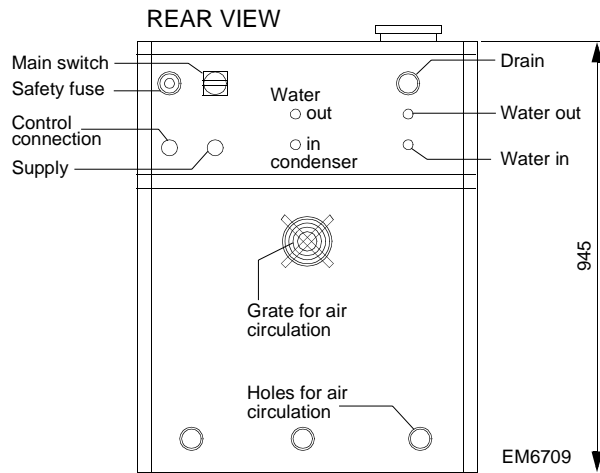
Dimensioned sketch of ZEM 1000 CW versions
